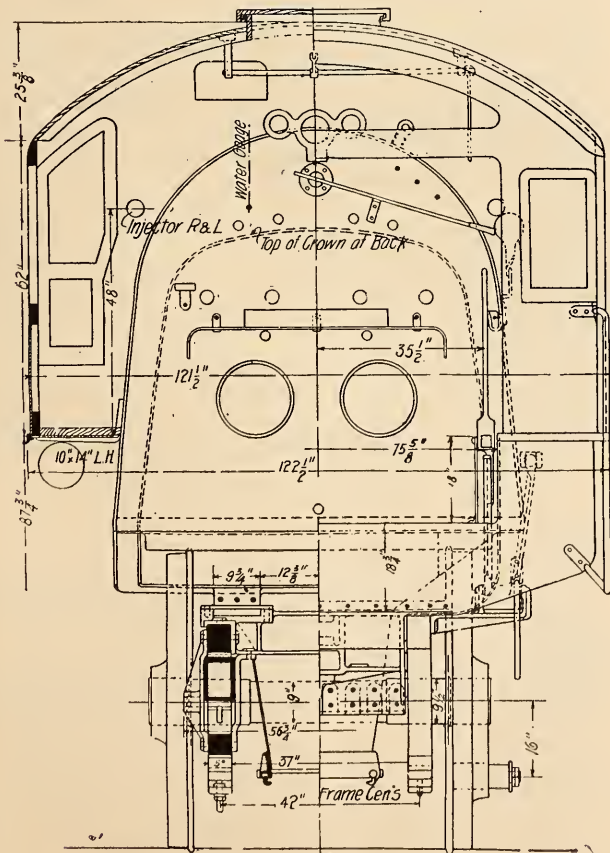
NEW YORK CENTRAL CONSOLIDATION LOCOMOTIVE—REAR ELEVATION AND SECTIONS.
